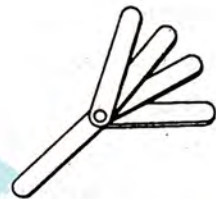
A feeler gauge, which has thin metal strips of different thickness.
